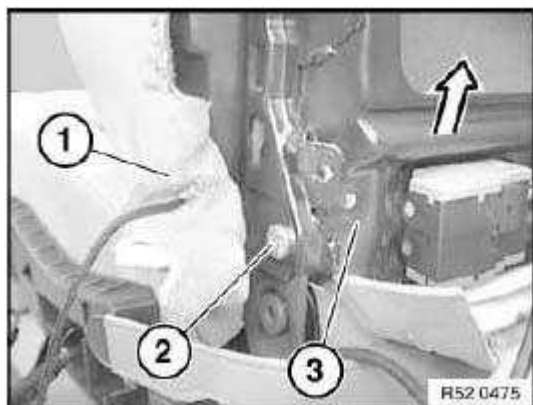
Removing Backrest Frame With Backrest Cover Upwards
